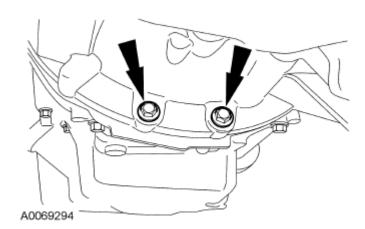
Locating Engine Mount Nuts Courtesy of FORD MOTOR CO.
